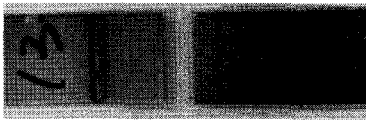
Laser welding of CR780DP with dissimilar thickness, 1.0mm and 1.4mm.
